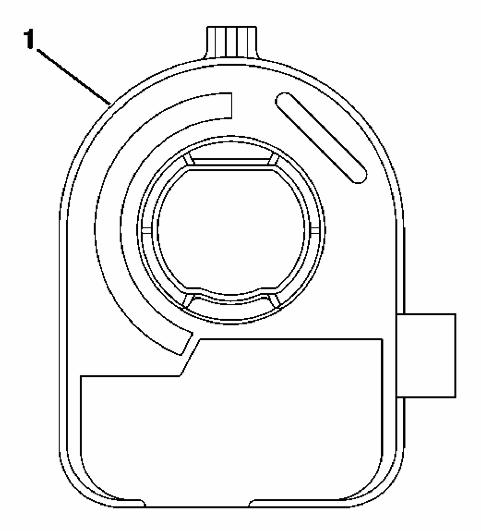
View Of Steering Wheel Position Sensor Courtesy of GENERAL MOTORS CORP.
